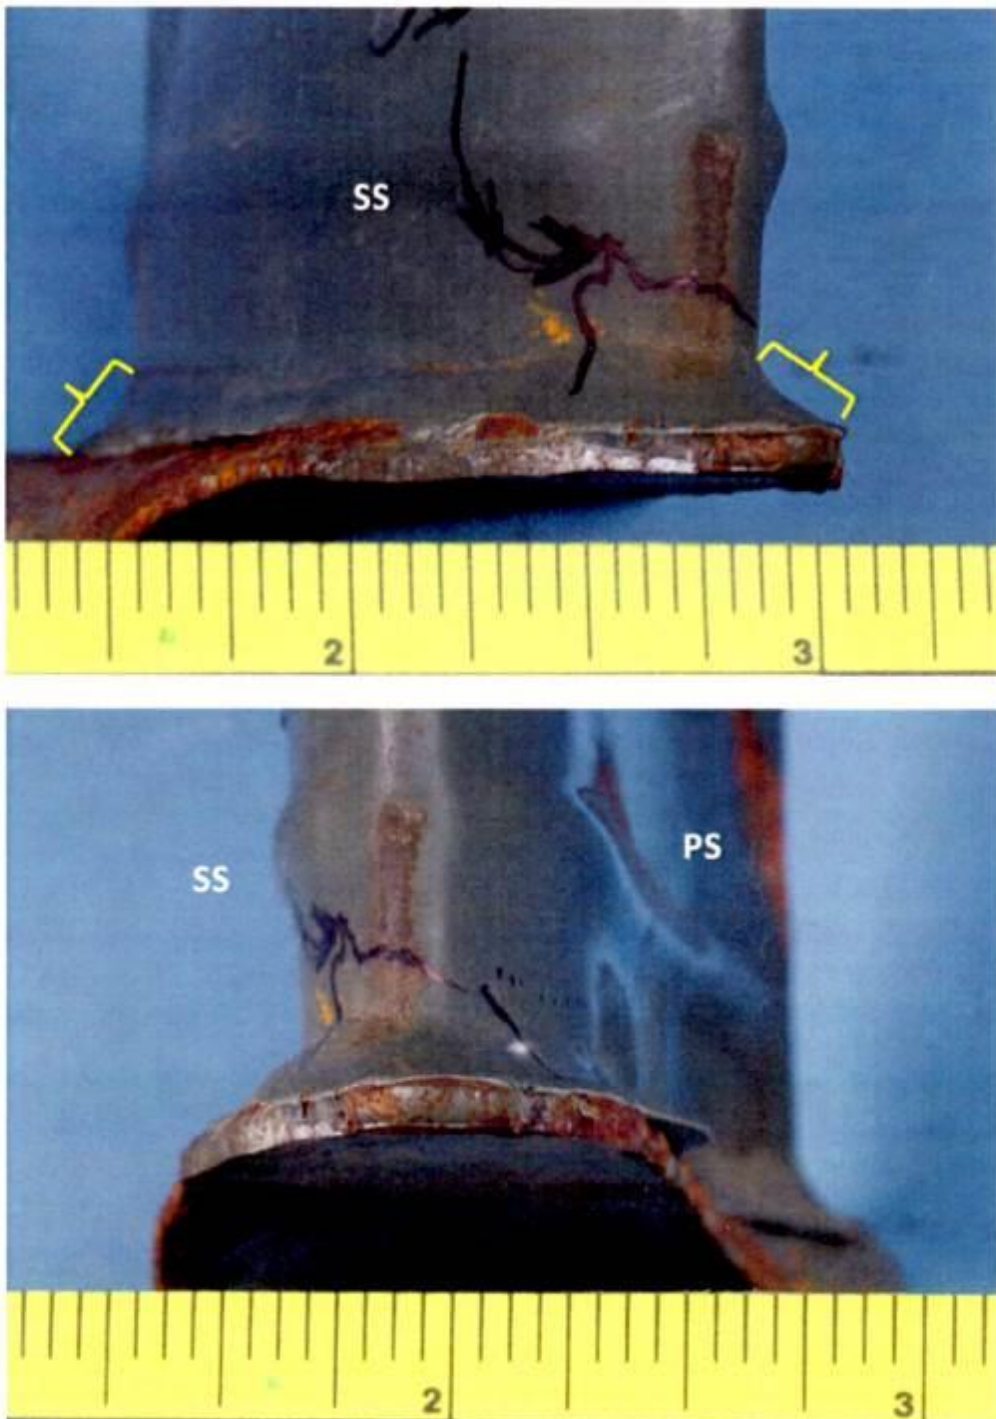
Close-up photos of the fracture surface at the aft side of the blade leading edge. The yellow brackets indicate the weld on the blade.
